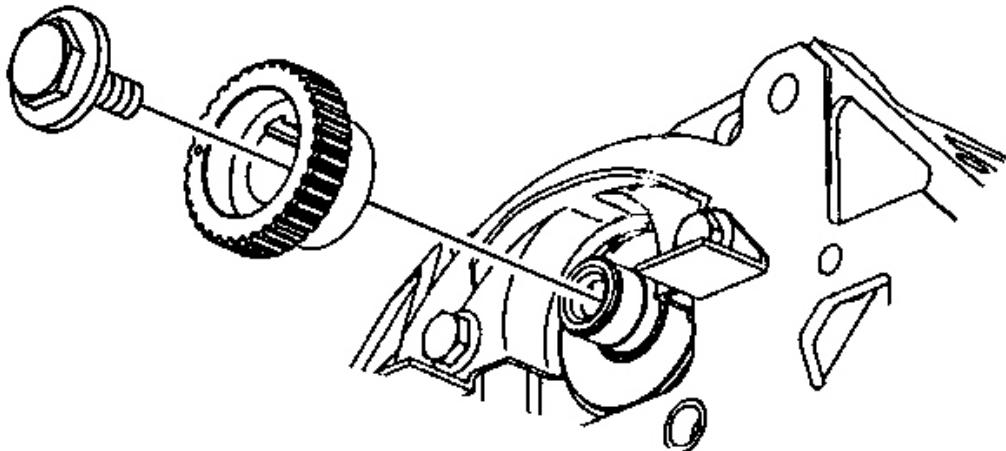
Balance Shaft Driven Gear & Bolt
